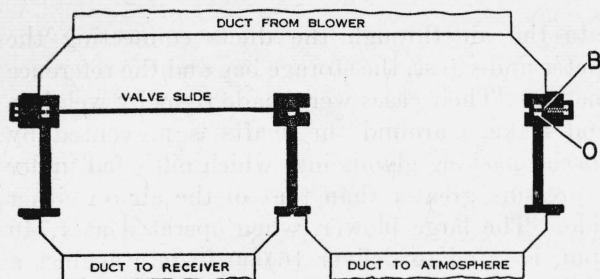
Longitudinal section through large shutter valve, showing relation of valve slide, oil grooves, and oil groove covering bars.
